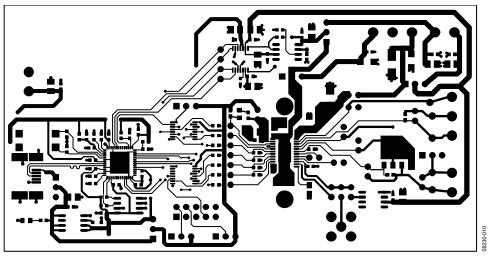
AD5422 TSSOP Evaluation Board Component Side PCB
